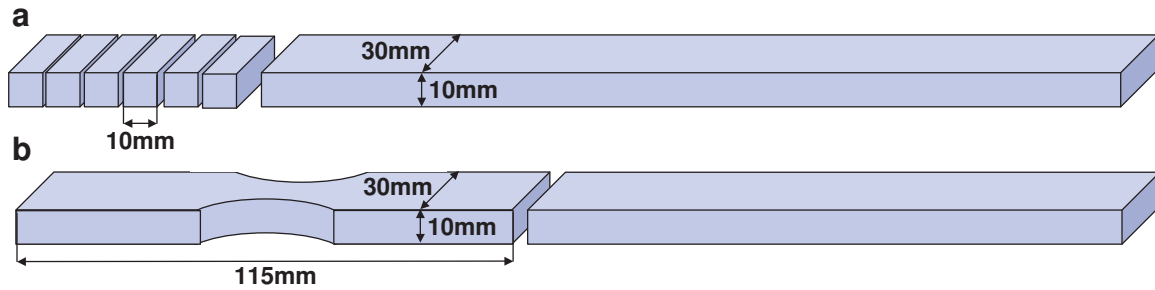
(a) Fabrication of hardness test samples; (b) fabrication of tensile test specimens.
